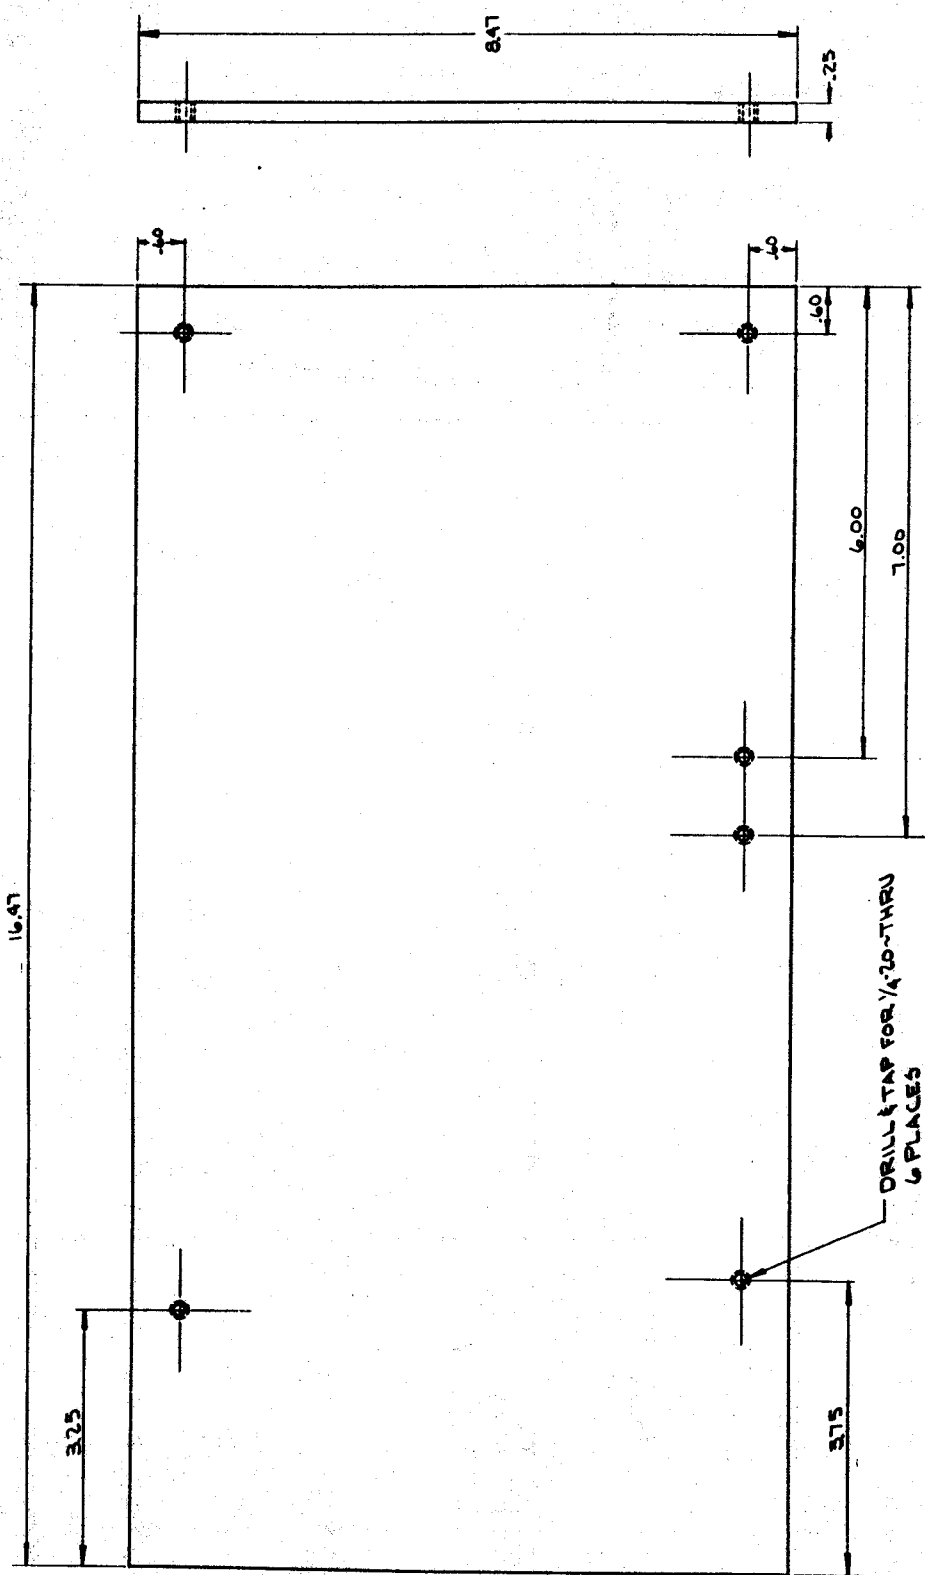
Detail Drawing of Detector Assembly Box, Vacuum Chamber.
